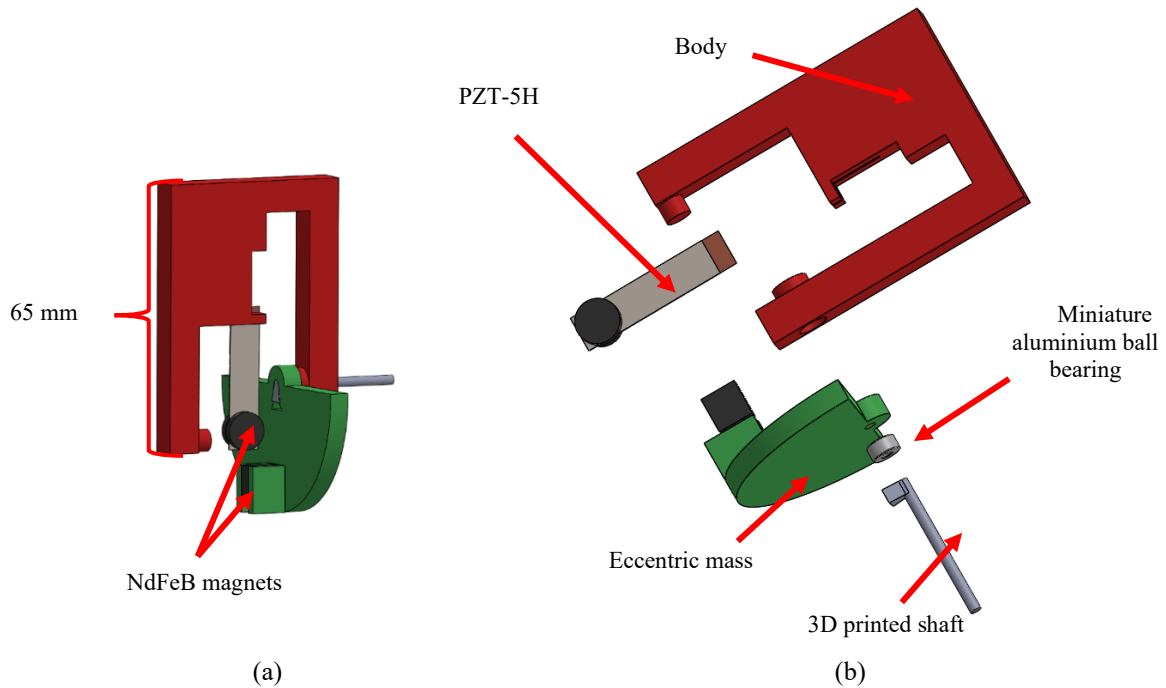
(a) The design of the piezoelectric energy harvester utilizing beam deflection method, (b) Exploded view of the design.
